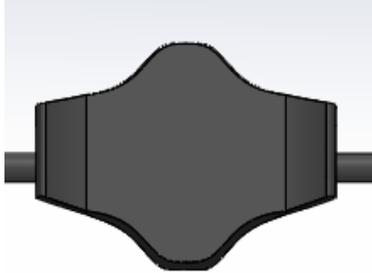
Solidworks drawing of the sheet used for the chest restraint
